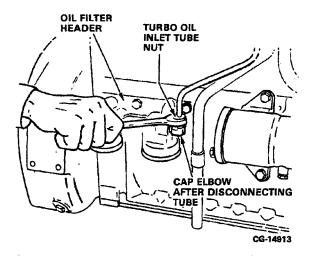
Disconnect Turbo Oil Inlet Tube
